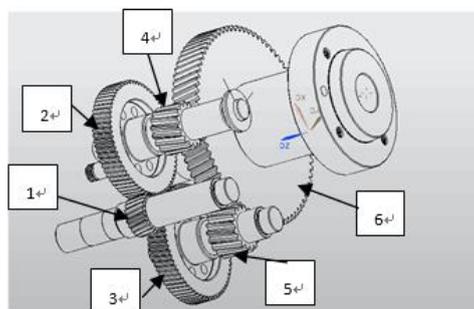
Three-dimensional diagram of double helical gear anti-backlash mechanism
